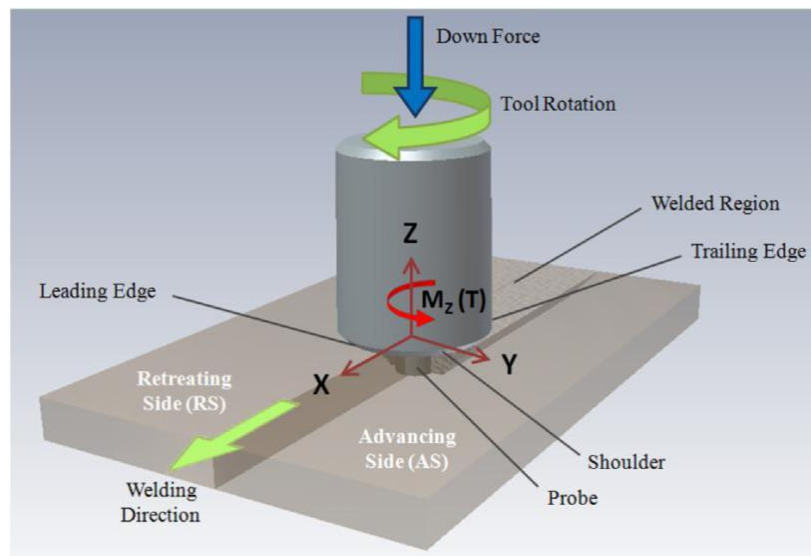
FSW process diagram, butt weld configuration [2]
